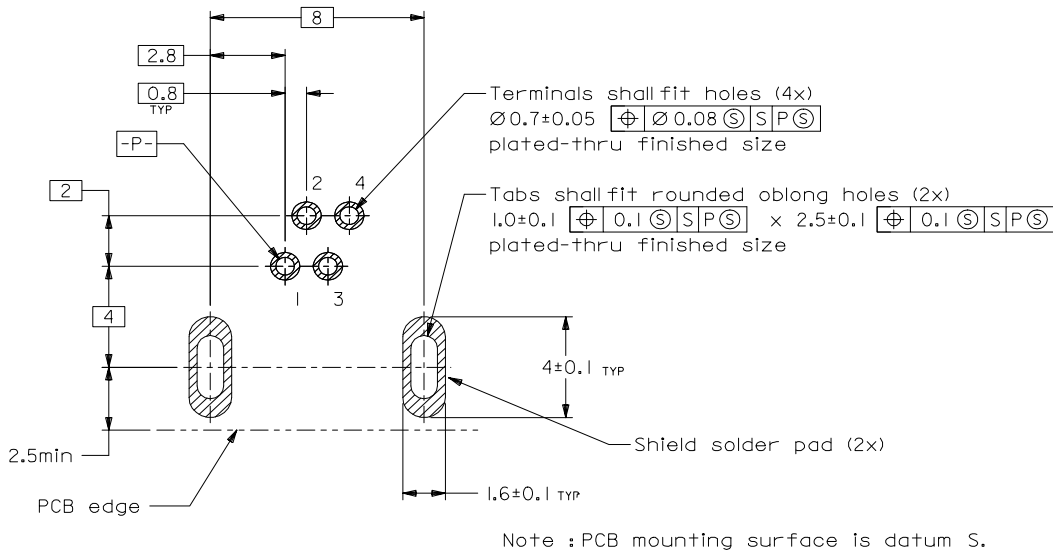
Flat through-hole mount printed circuit board connector footprint
